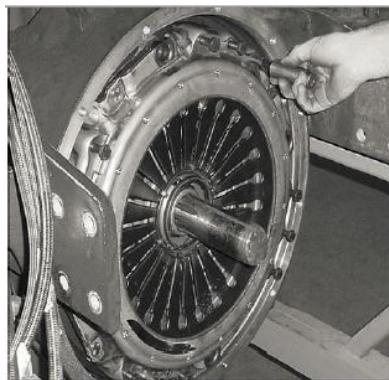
Installation of Pressure Plate (Using a Centering Pin)
